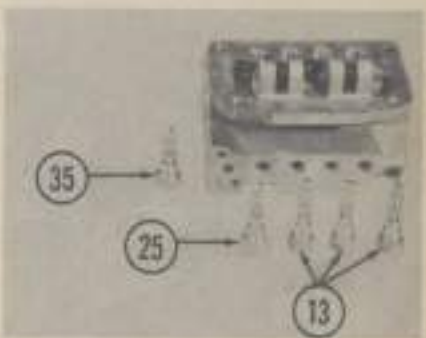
Pump check (discharge) valves. Seat inserts can be removed by tapping to accommodate a puller screw.
